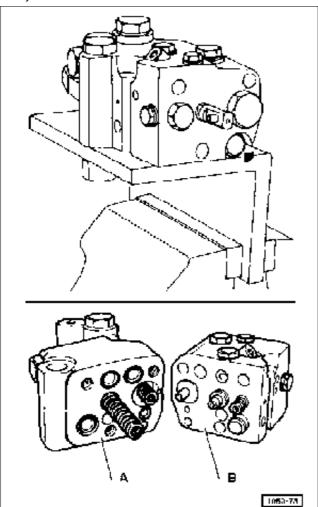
Stripping the hydraulic distributor. A Front case B Rear case
